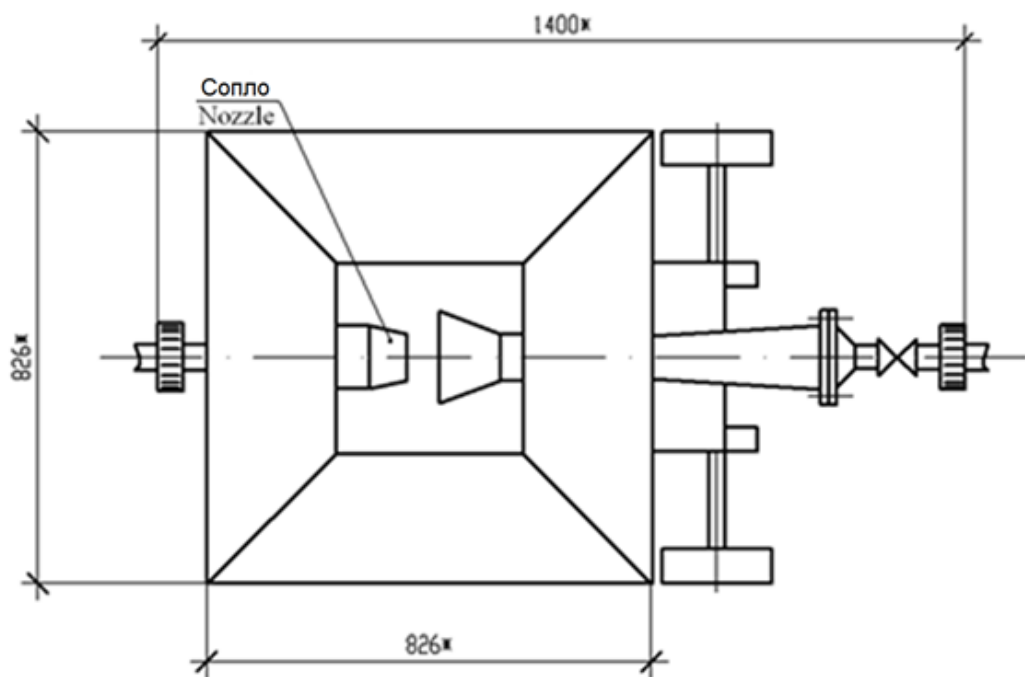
Hydraulic conveyor (50LDP50AP001, 60LDP50AP001)
